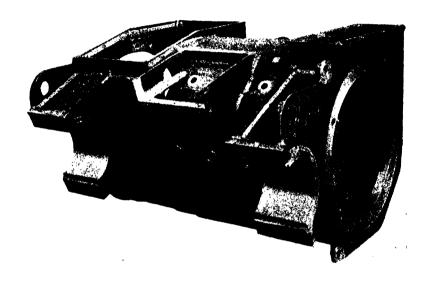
Machined cast-steel frame for nose-suspended motor.
